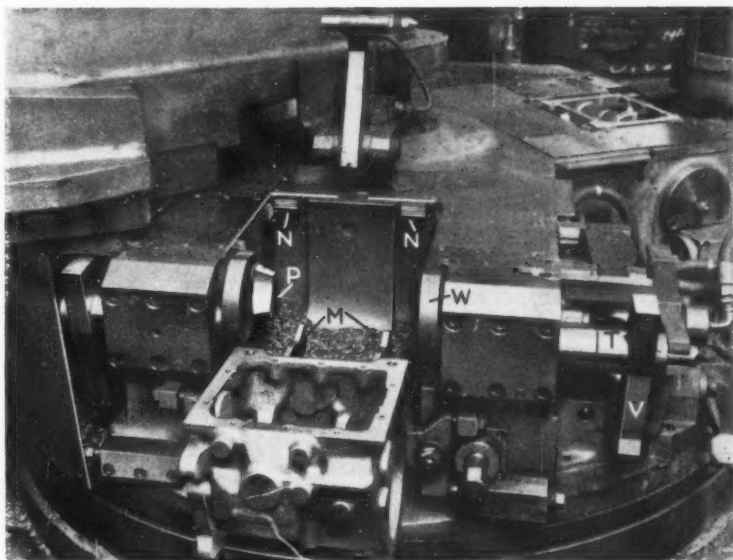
From the Shot-blast Plant, Castings are Delivered by an Inclined Roller Conveyor to this Machine for Rough-milling, Drilling and Finish-broaching of the Cover Face
